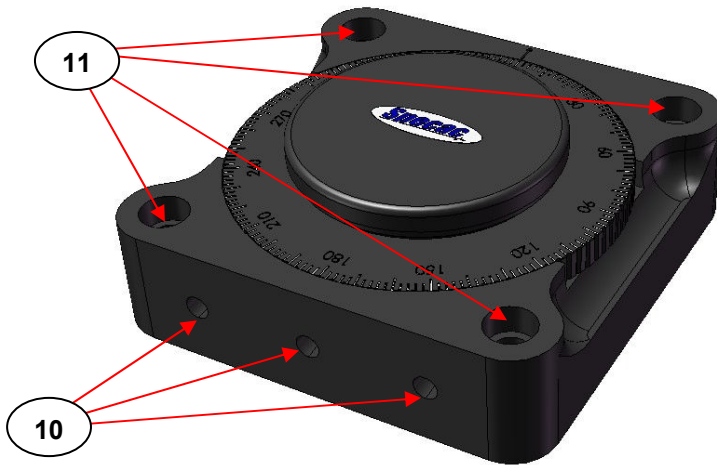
Fixing and Support Post and Fixing Holes on the GS57340 Series Rotator Mount
